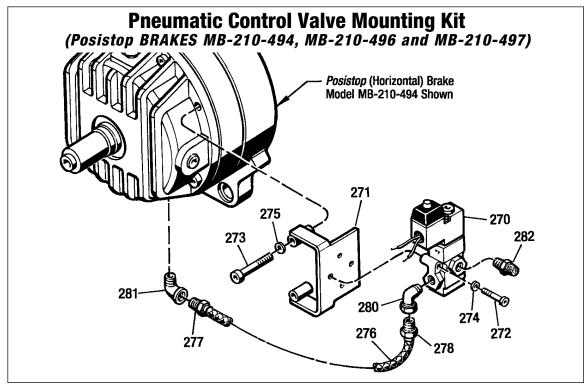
Pneumatic Control Valve Mounting Kit
